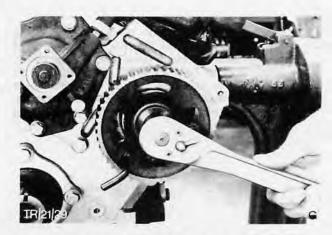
Lock camshaft gear using Special Tool 21–016 and secure
